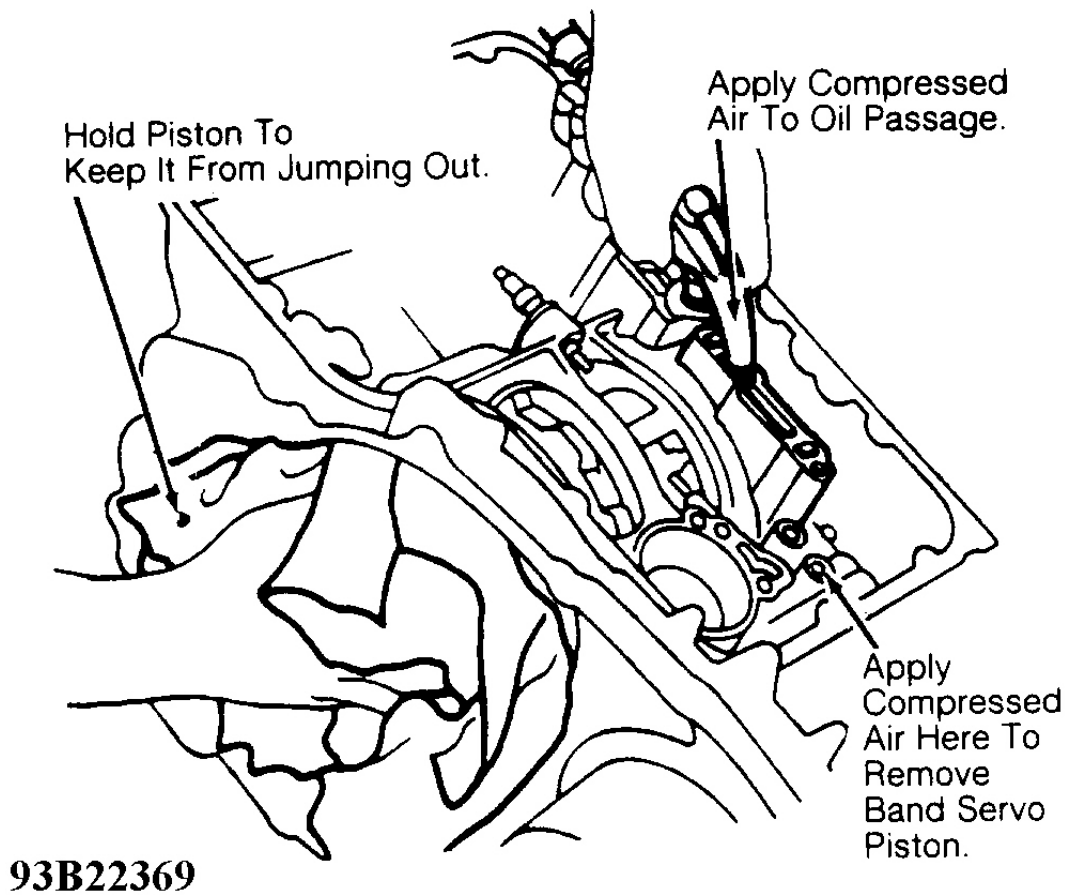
Removing Low-Reverse Brake Piston & Band Servo Piston
